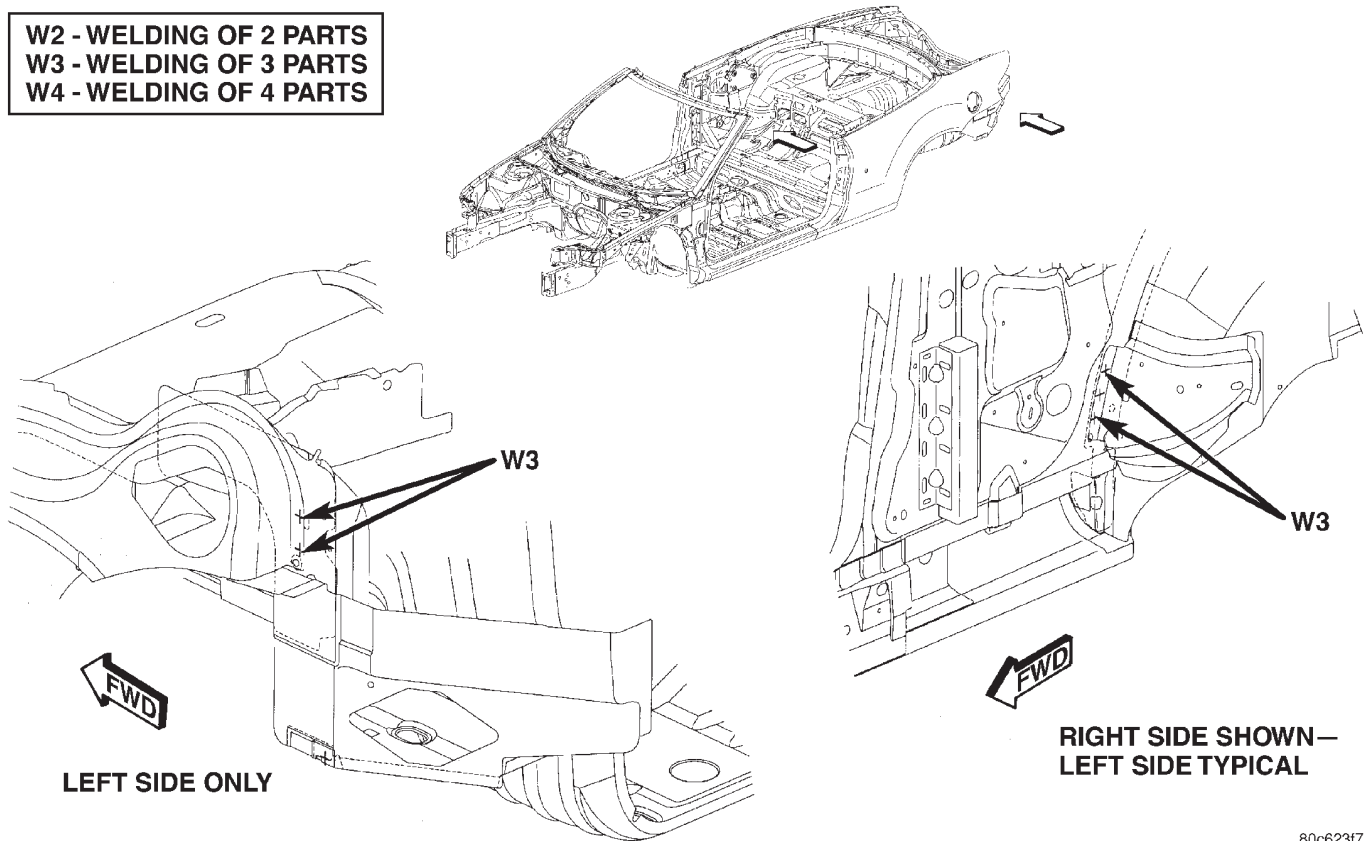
LOWER OUTER QUARTER PANEL EXTENSION TO REAR INNER QUARTER PANEL TO REAR INNER WHEELHOUSE
